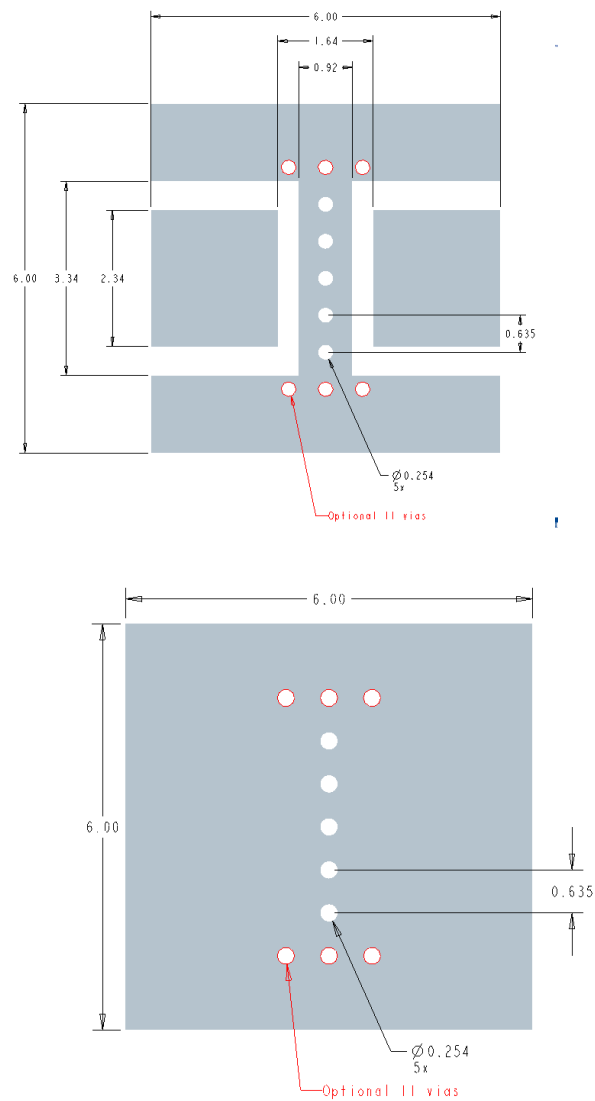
Recommended footprint for XLamp XB family of LEDs on FR-4 PCB (top and bottom)
